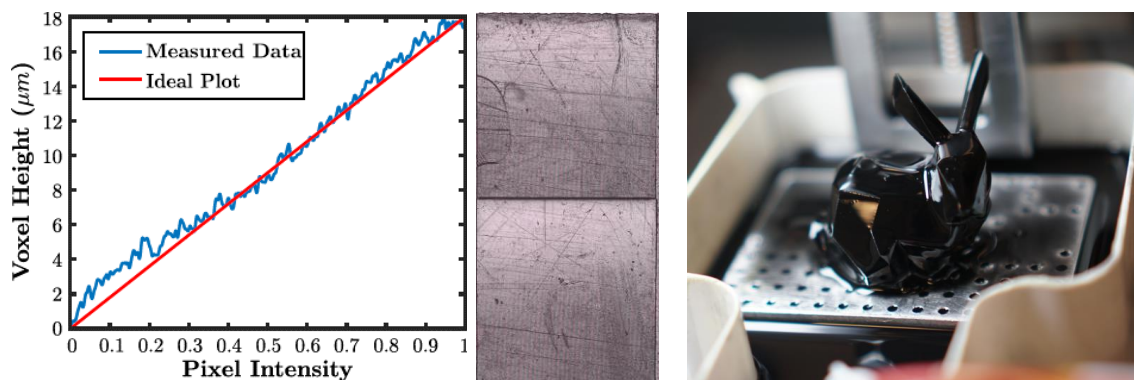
Left: subvoxel slopes printed in one layer with a DLP printer [4]. Right: example of a low poly Stanford bunny printed using a continuous DLP printing technique [2]. Although the continuous printer (right) does not print in layers, it still produces subtle aliasing artifacts due to voxels being fully lit or unlit.
